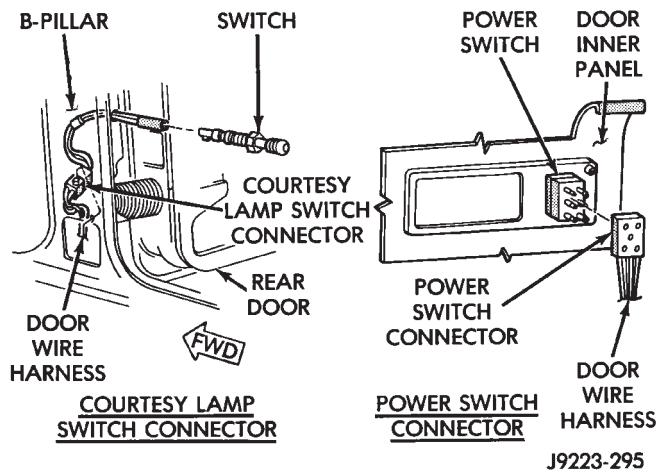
XJ Rear Door Courtesy Lamp and Power Switch Wire Harness Connectors
